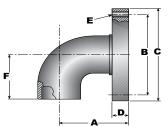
S* 90 ° Long Radius Elbow, Flange x Socket
